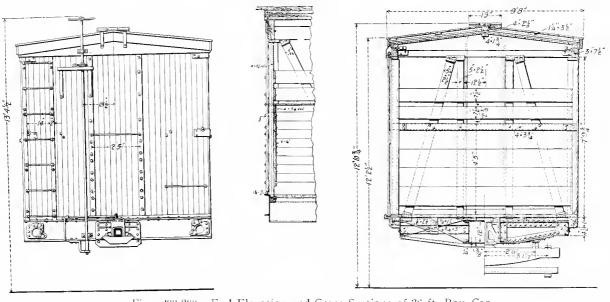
Half End Elevation and Cross-Section of 36-ft. Box Car, Steel Channel Center Sills. C., M. & St. P. Capacity, 60,000 lbs.
